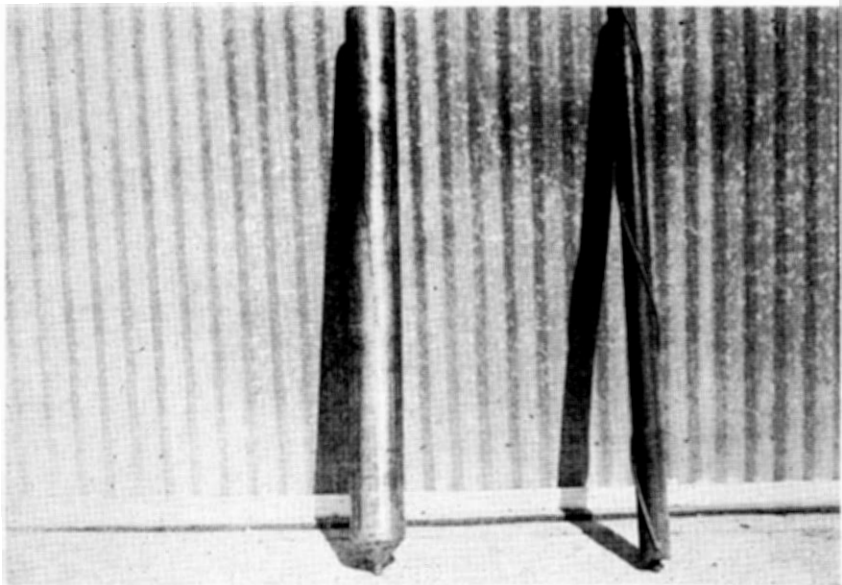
Stripper rolls fabricated from steel. The roll on the left is made of light gauge sheet metal. The roll on the right has a  $\frac{1}{4}$  inch rod spirally mounted on the roll.
